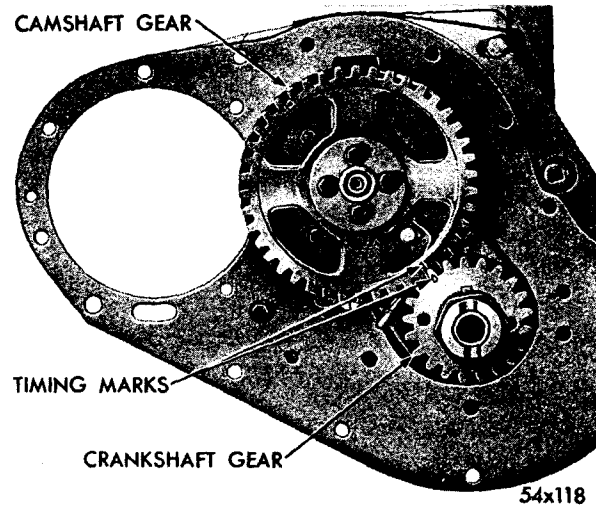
Mating Timing Marks on Camshaft and Crankshaft Gears
